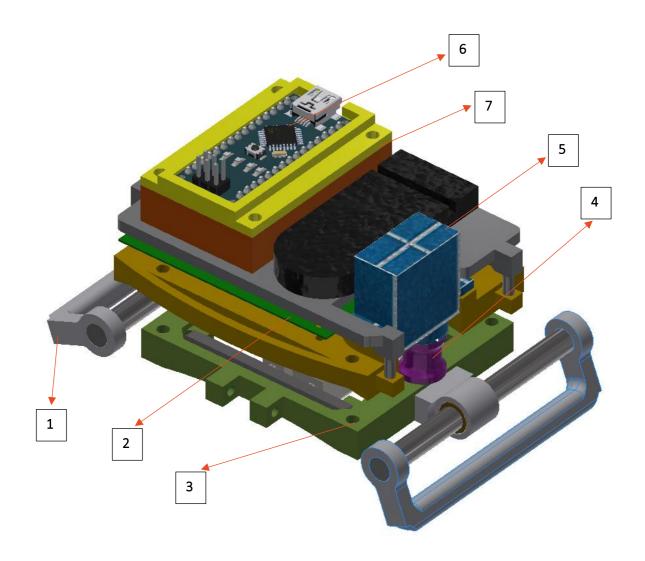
3D CAD MODEL FOR THE AUTOMATIC PLACEMENT OF TRANSDUCER ON WRIST WITH SERVO AND EMBEDDED PRESSURE SENSOR AND PUMPING MECHANISM
